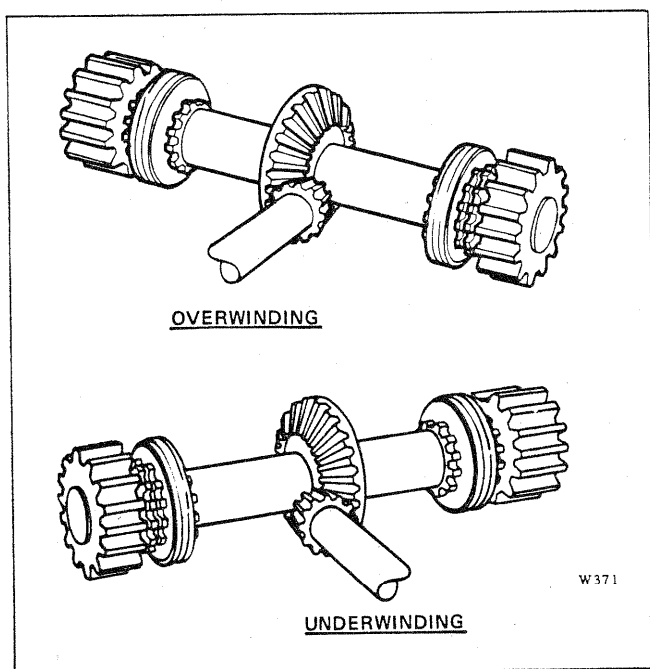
BEVEL GEAR SHAFT OVERWIND AND UNDERWIND ARRANGEMENT
